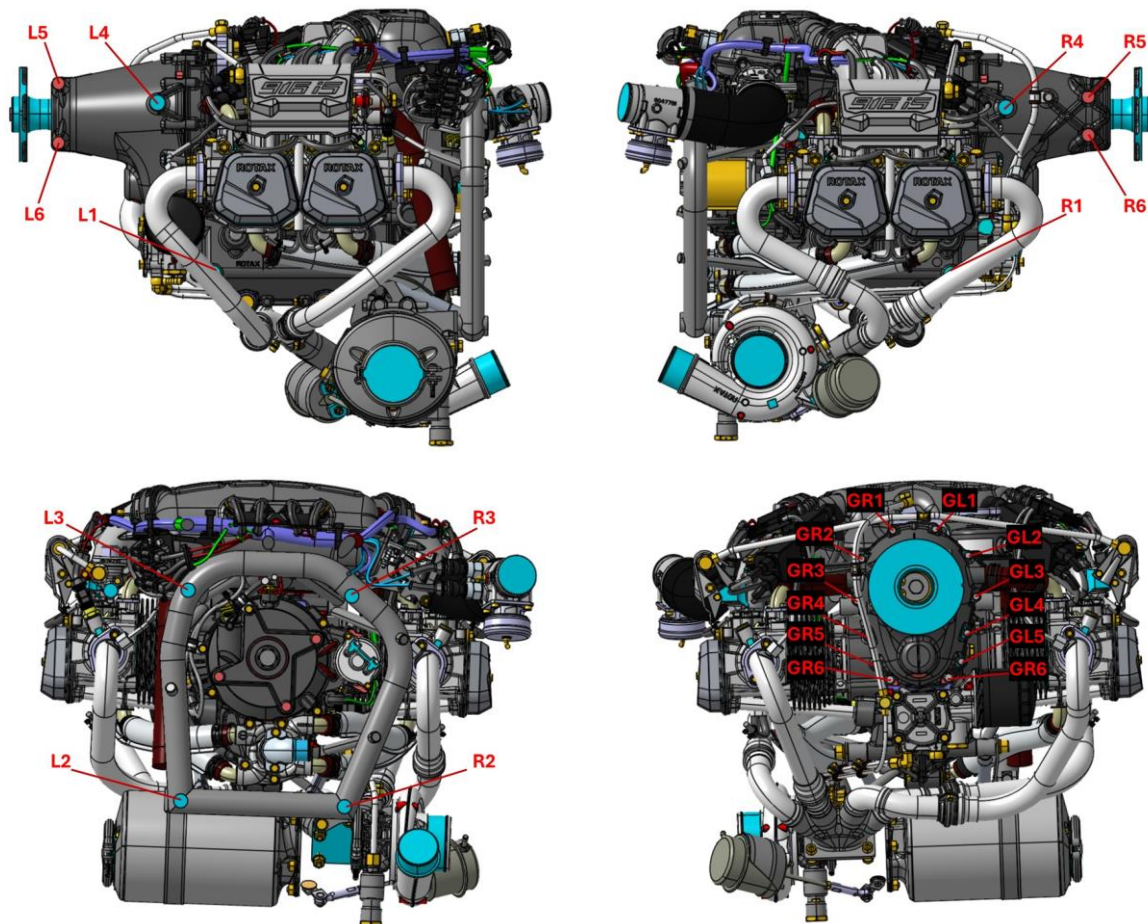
Left, Right, Back and Front View Rotax 916iS Attachment Points
